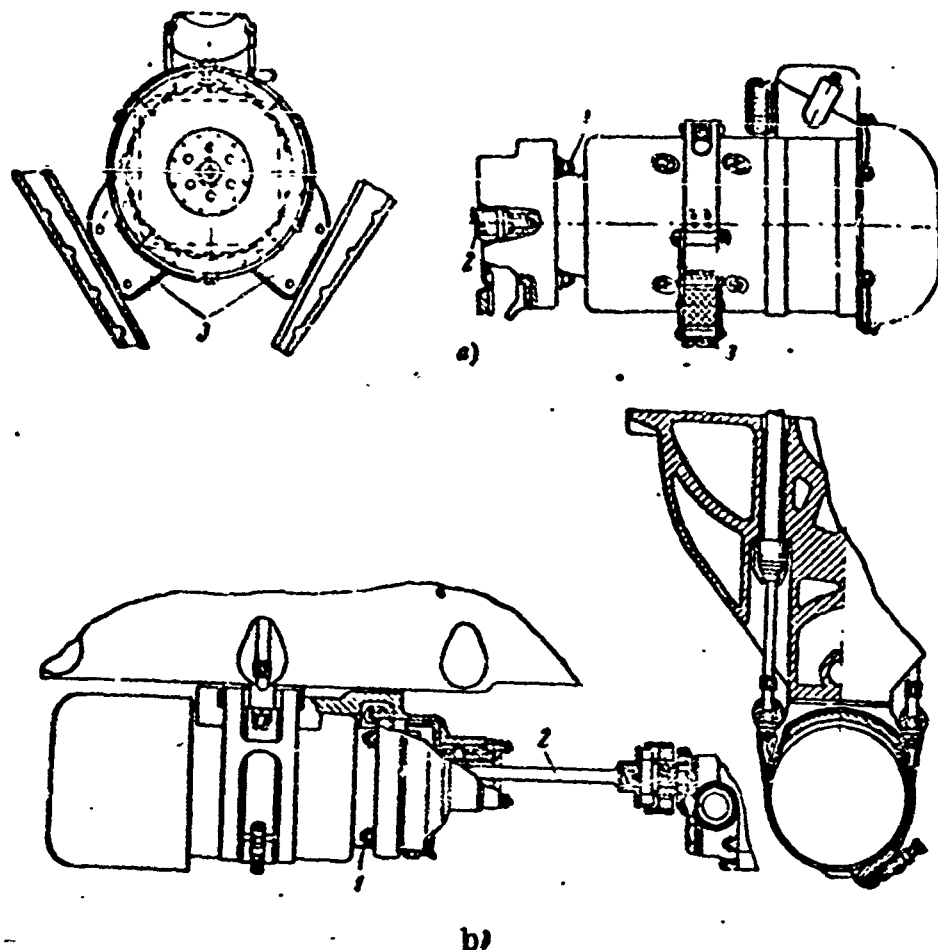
Generator driven from piston aircraft engine. a) Direct drive; b) remote drive. 1) Bolts attaching generator flange to engine; 2) generator drive; 3) rubber pads on which generator rests.
